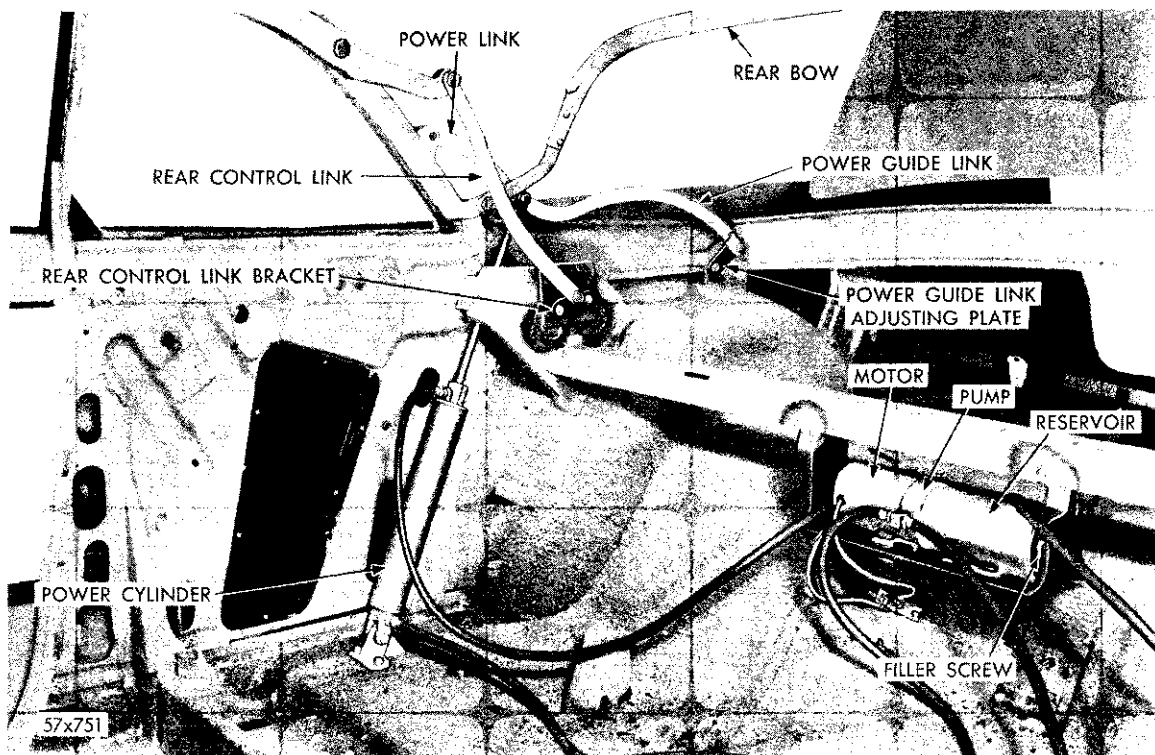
Convertible Top Hydraulic Folding Mechanism
